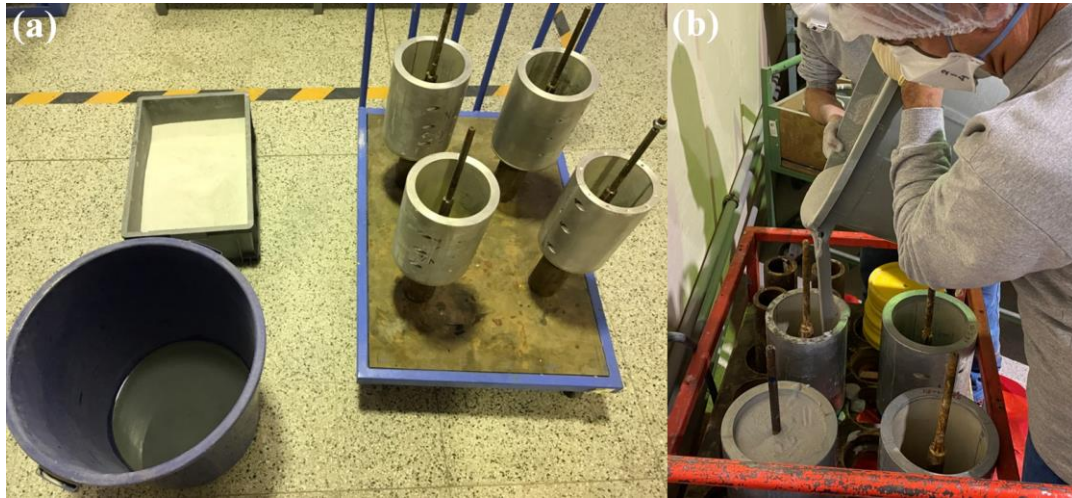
(a) Water soluble mandrel mould preparation (b) Pouring of soluble mandrel to moulds
